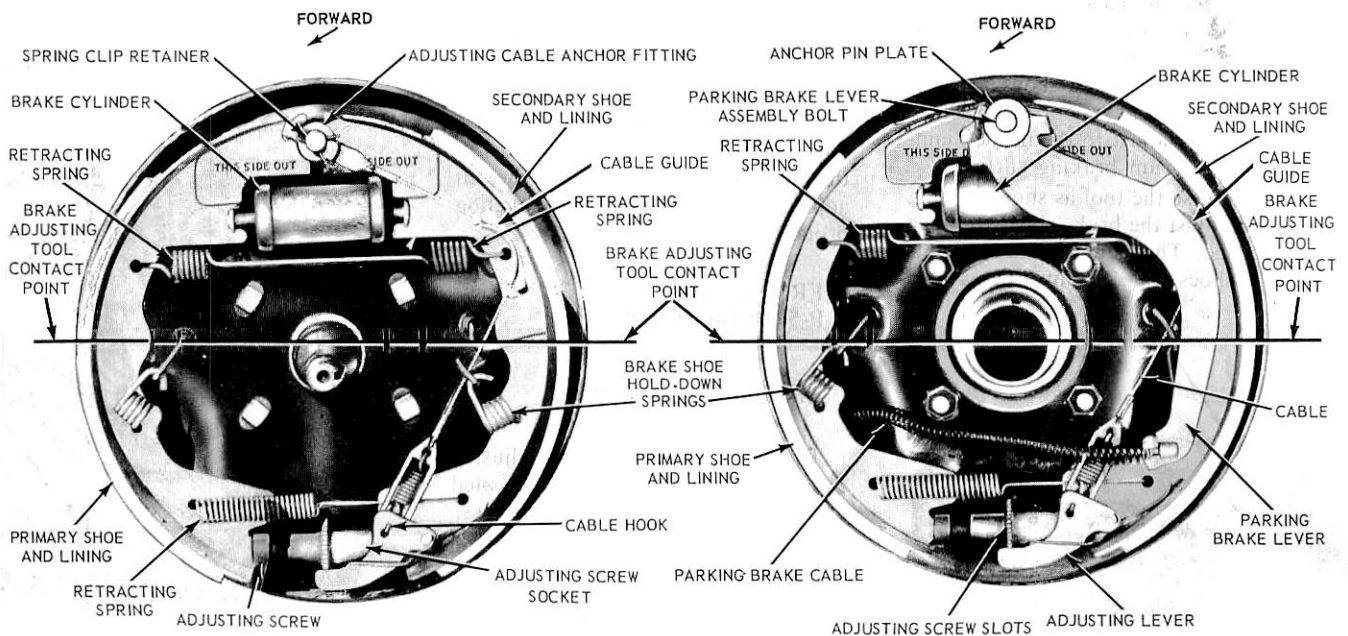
Self Adjusting Brake Assemblies—F-250 (Heavy Duty)—350, E-300, and P-350-400-3500-4000
